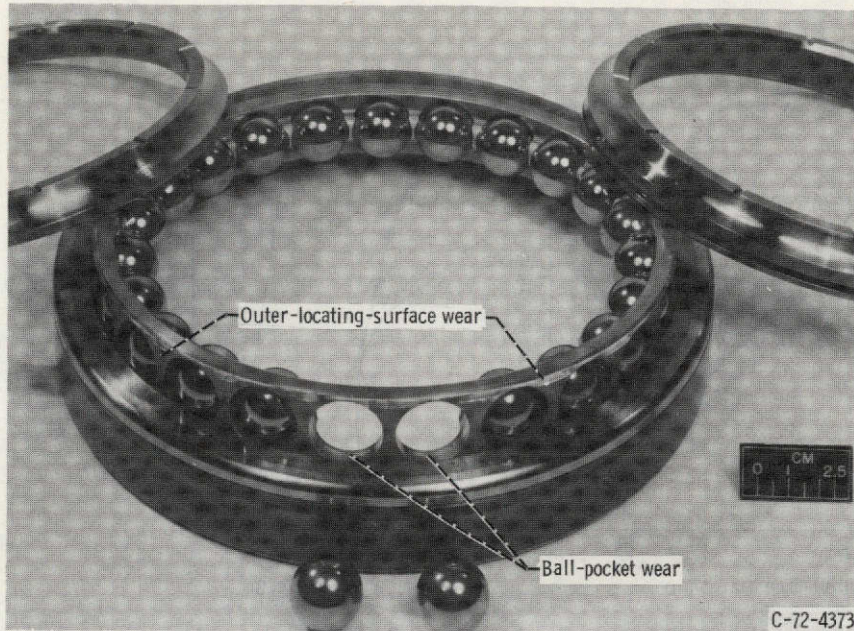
Solid ball bearing 433A after 17 800-newton (4000-lbf) thrust load run at speeds from 6670 to 20 000 rpm (1 million to 3 million DN), showing ball-pocket and outer-locating-surface cage wear.
